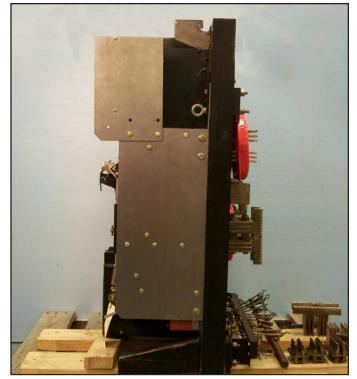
DTA / Aux. CT Module Assembly Mounted to the Breaker.
